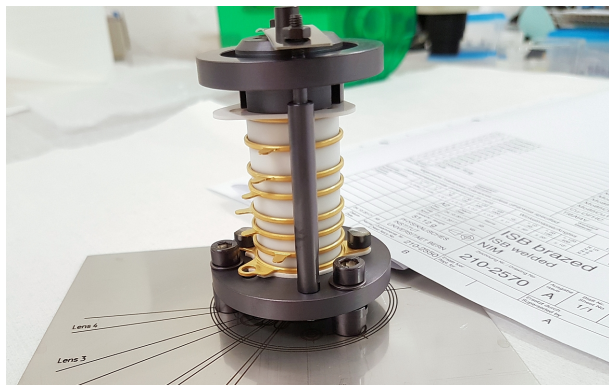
ISB assembled in the brazing jig just before the brazing step.
